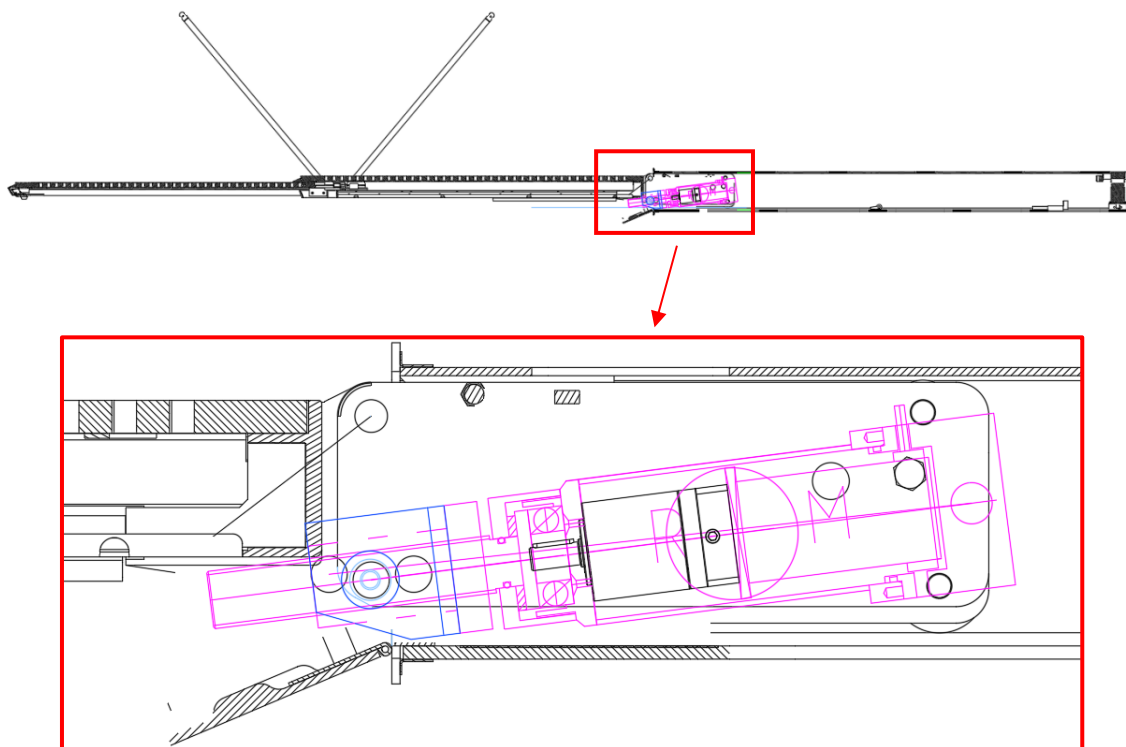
Autocad drawing of the positioning of the mechanism inside the passerella, in red a more zoomed view
